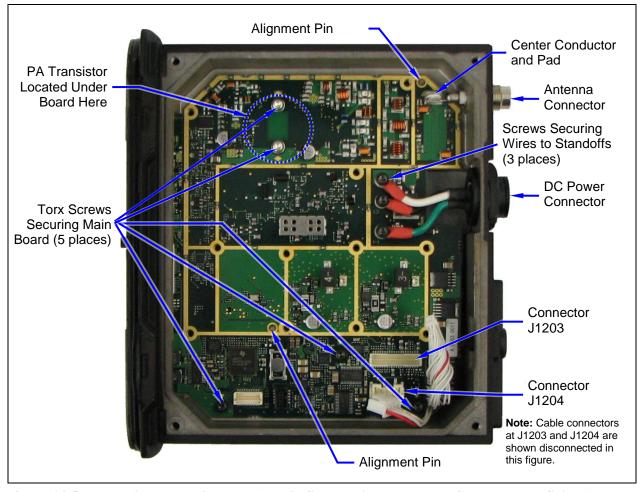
Removing the Main board (Radio Shown without Bottom Cover and RF Shield)
